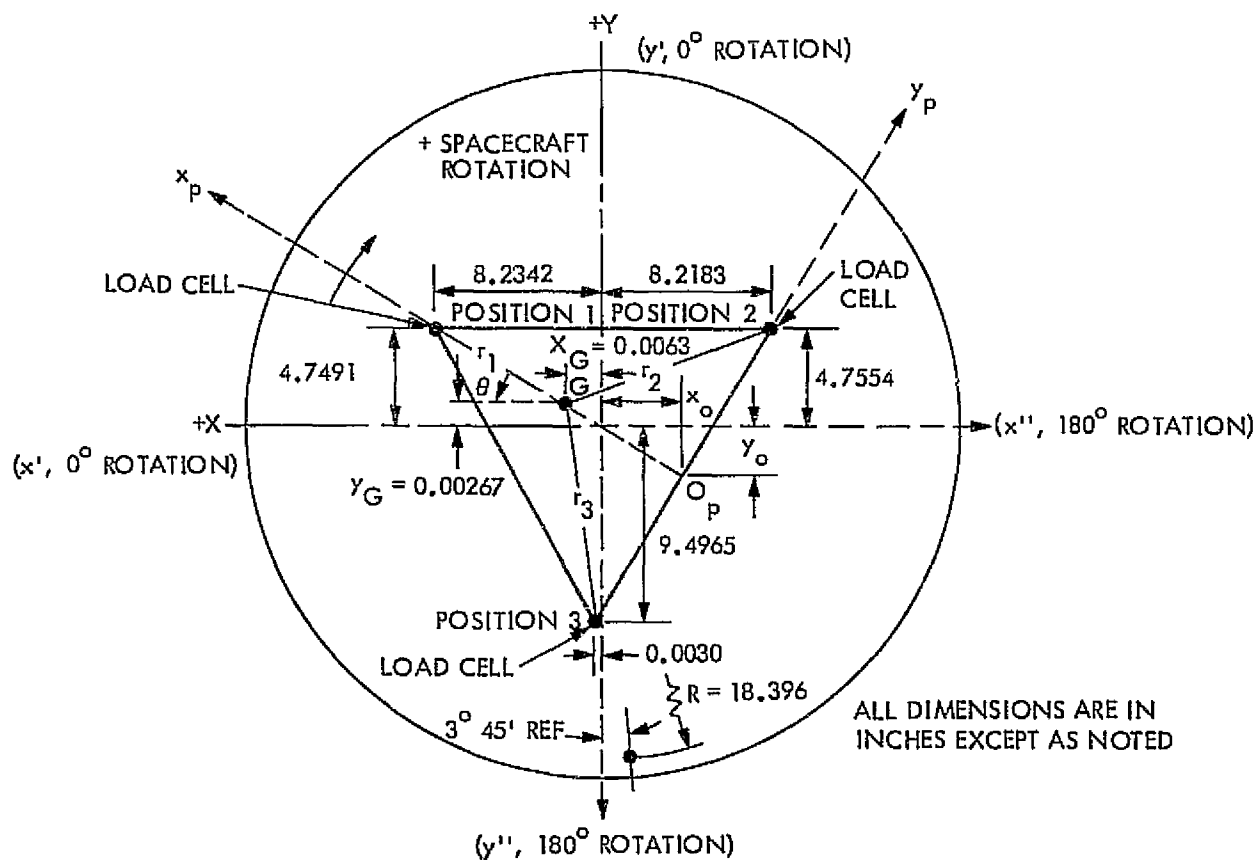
Actual Dimensions of the Voyager Mass and CM Measurement Fixture Load Plate
